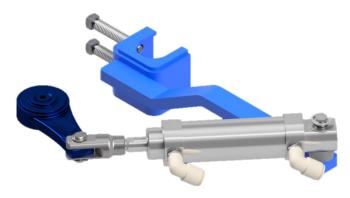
HSA38 – Valve Mount Arm, Chlorine Cylinder
